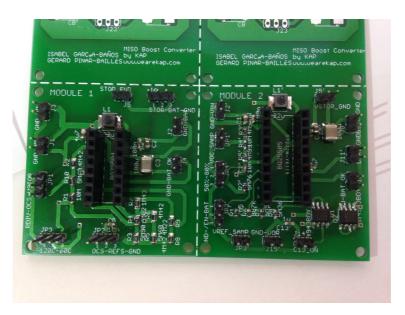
Soldering module 1 and 2 pins [Self-made]
